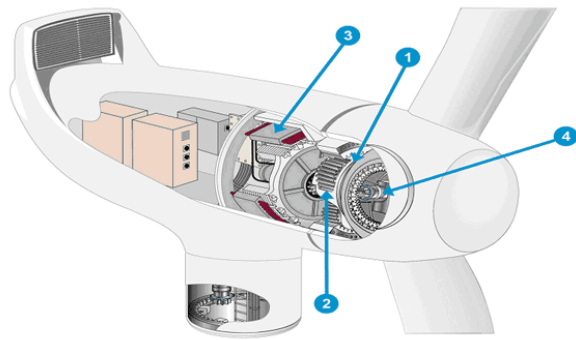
The structure of a Finnish wind turbine constructed by WinWinD Oy. The tower was manufactured by Levator Oy (source: Levator Oy).
